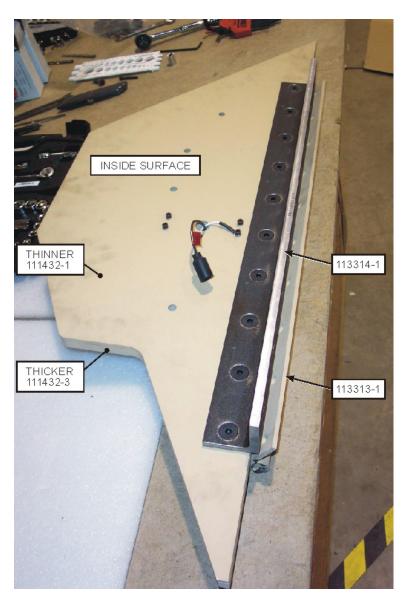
Installing the Door Hinge and Hinge Bracket on the Front Cab Armor Panel.
